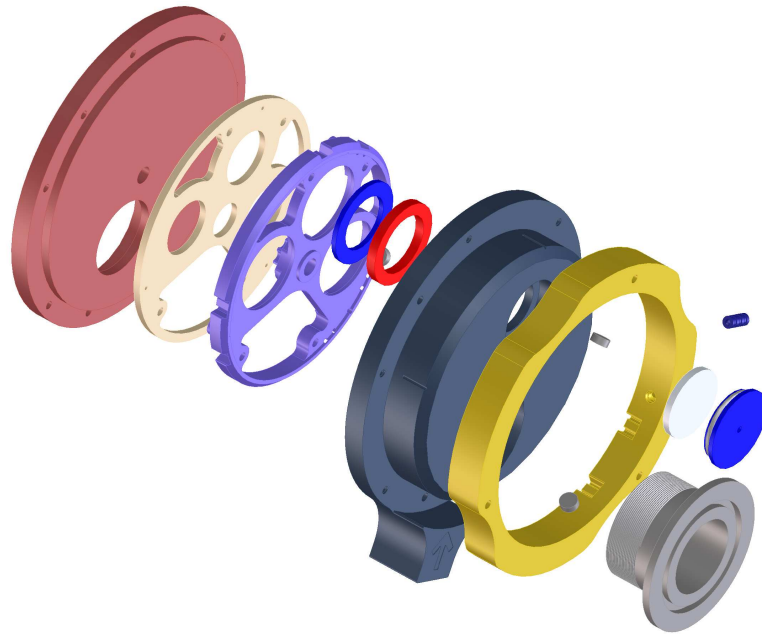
3-dimensional renderings of an exploded and assembled vacuum-compatible filter wheel
